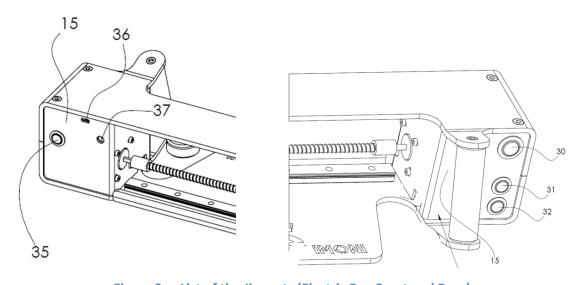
List of the Jig parts (Electric Box Front and Rear)
